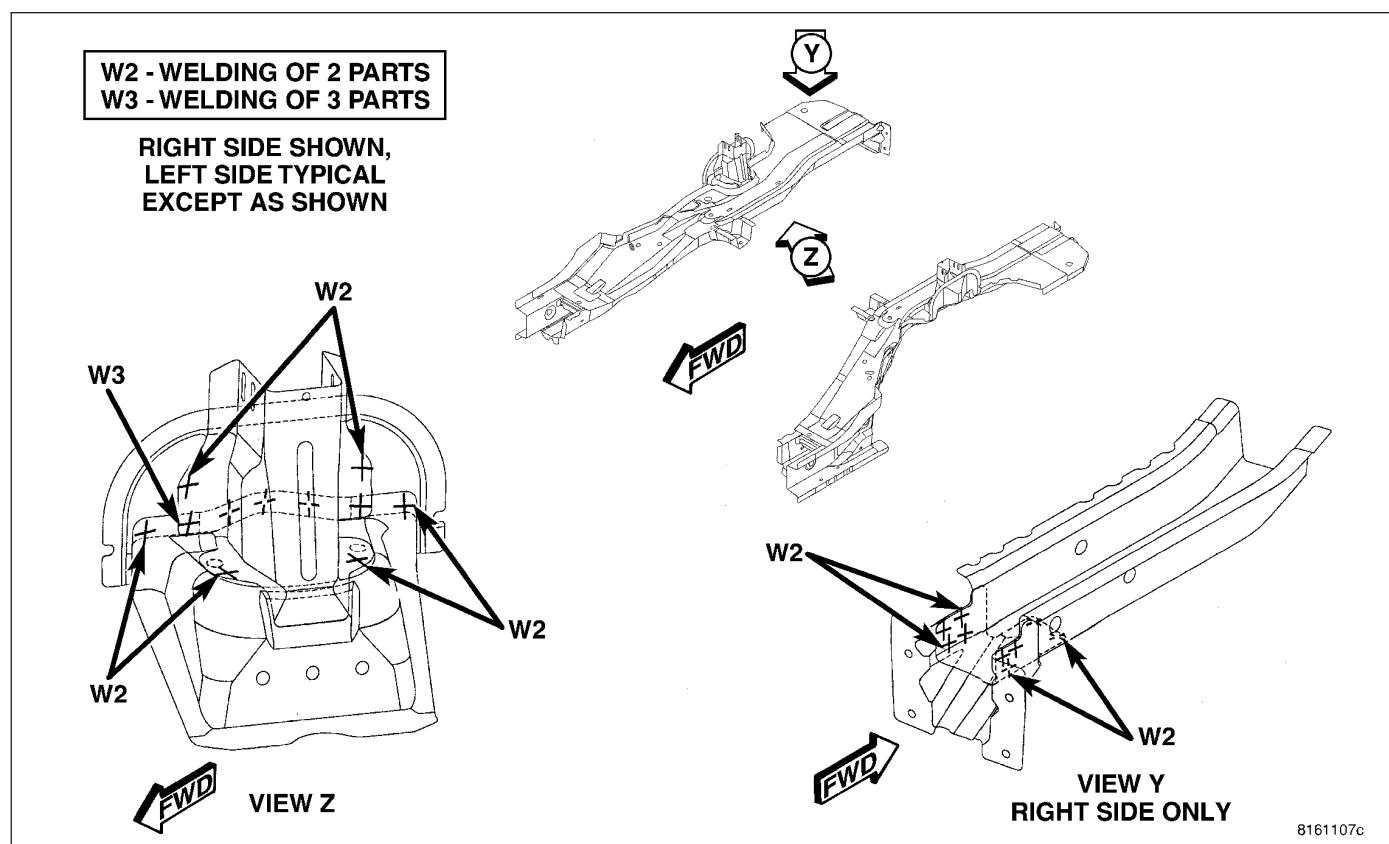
SIDEMEMBER ASSEMBLY (1 OF 17)
